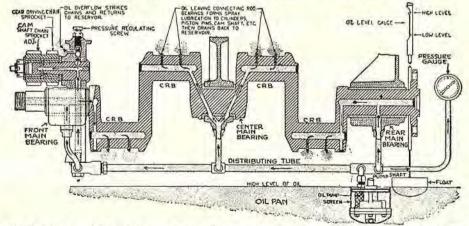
Example of a force-feed lubrication system showing a drilled crankshaft. Oil is supplied from oil pump through distributing pipes or tubes to crankshaft main bearings, thence through drilled passages to connecting-rod bearings. Oil pump in this example is a gear type and is submerged.
